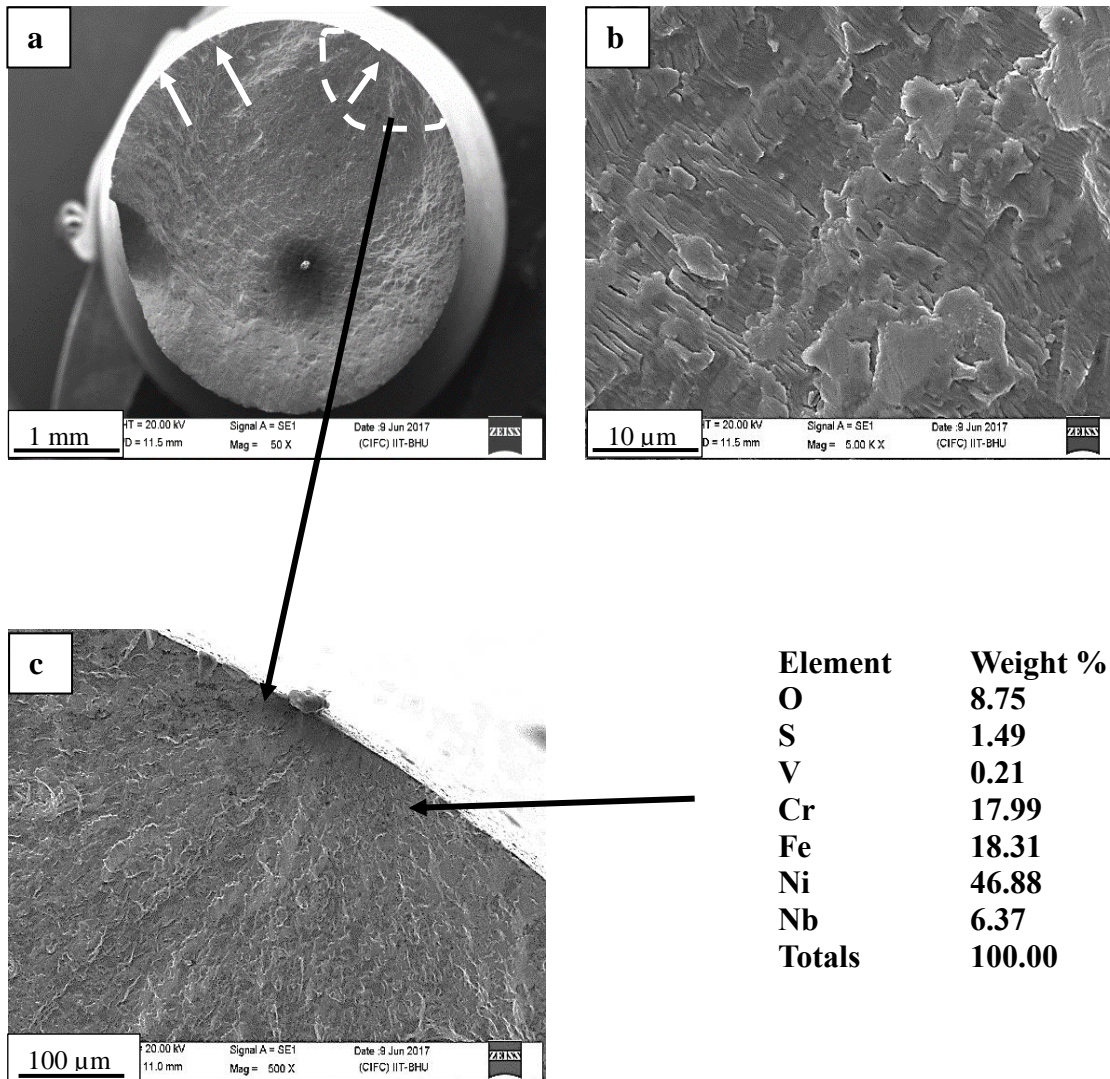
9: Fractographs of the fatigue sample pre-corroded and fractured from HCF at the stress amplitude of ± 550 MPa at 600°C in air showing: (a) fracture surface and crack initiation sites, (b) fatigue striations and (c) EDS analysis close to the crack initiation site.
